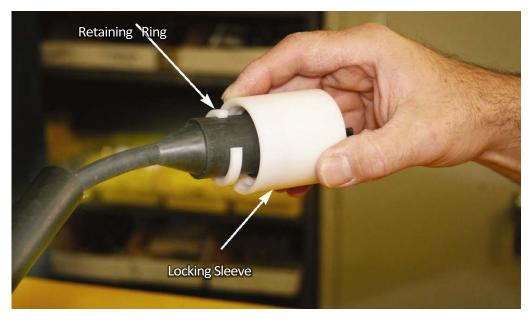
Retaining Ring and Locking Sleeve Removed
